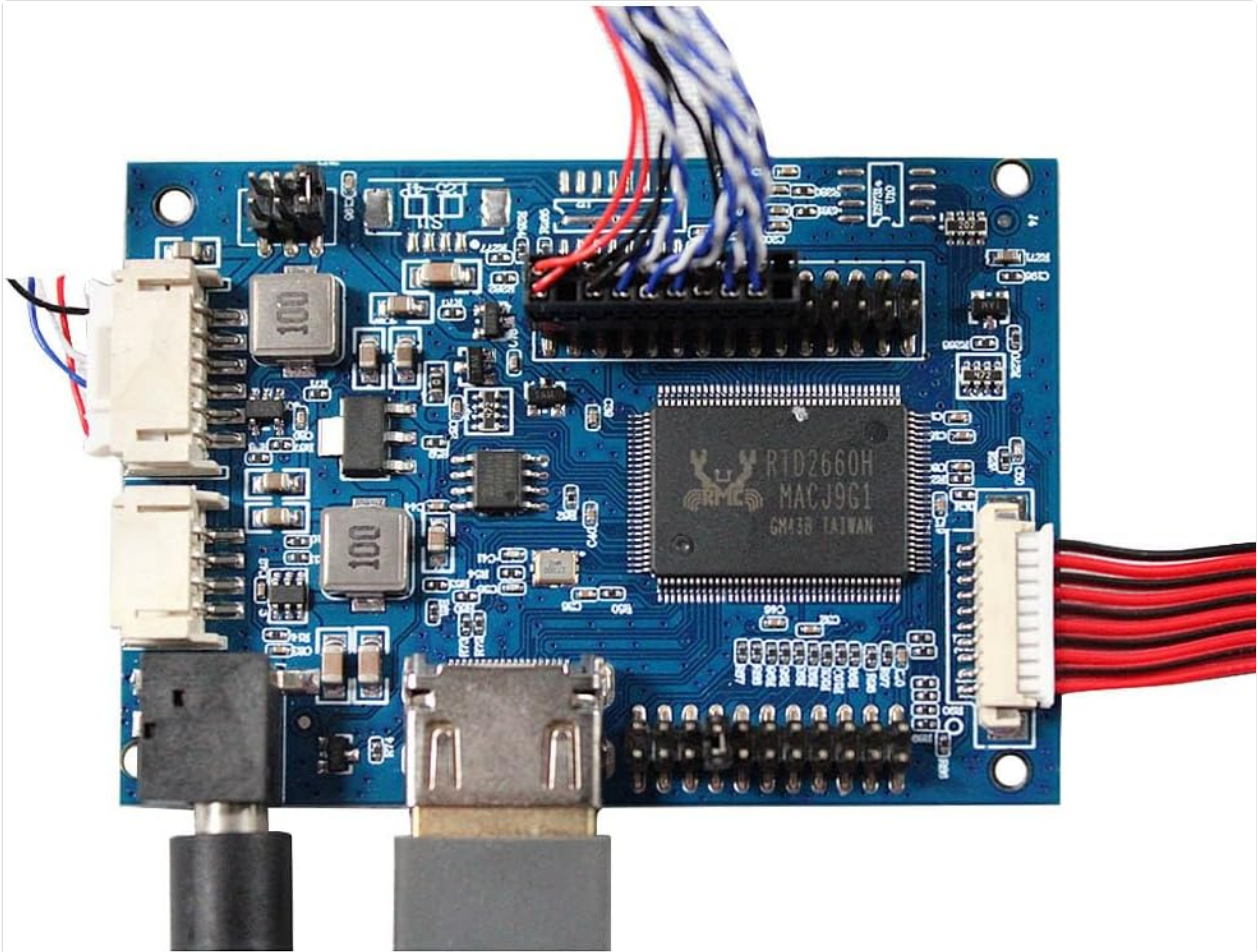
Close-up view of the controller board, highlighting the keyboard connector.
